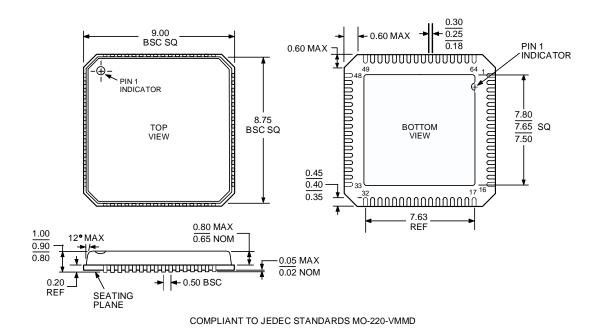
64-Lead Frame Chip Scale Package [LFCSP] (CP-64)—Dimensions shown in millimetres
